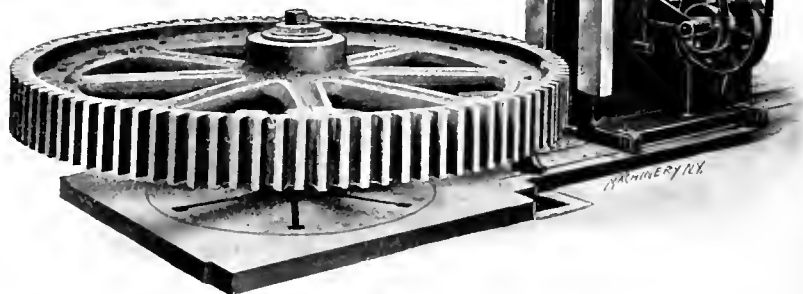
The Newton Portable Slotter, arranged with Templet Mechanism and Indexing Base for Cutting Spur Gears.
